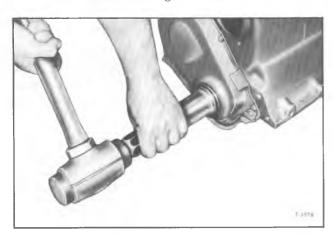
Installing Front Cover Oil Seal (Cover Installed)
